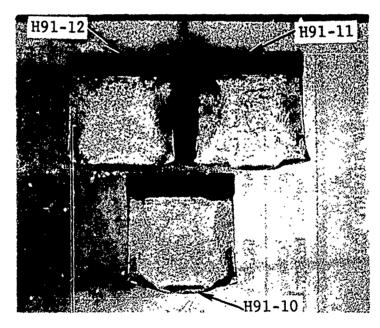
CHARPY IMPACT FRACTURES - PANEL H91
